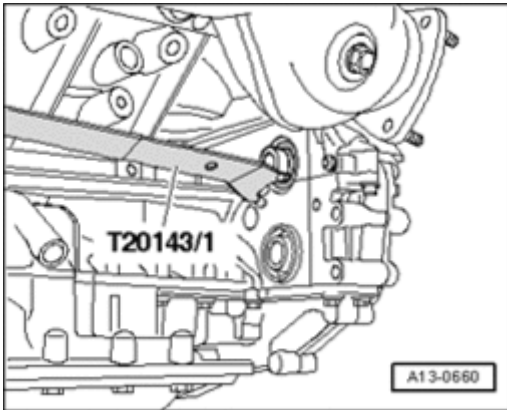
Prying Out Sealing Ring For A/C Compressor Drive Using Pulling Hook T20143/1
